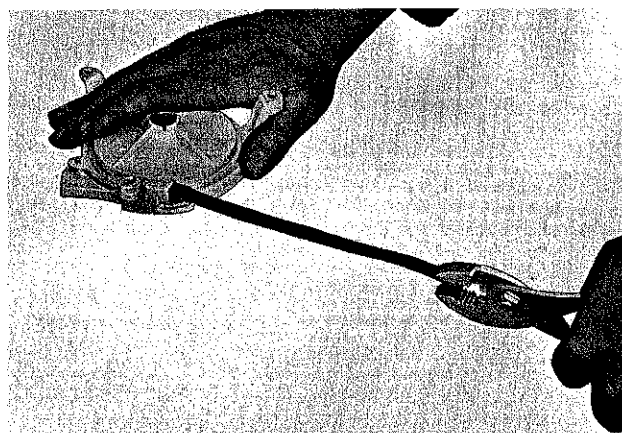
The starter spring may be removed from the base by pulling the spring out from the side of the base held on a flat surface.
